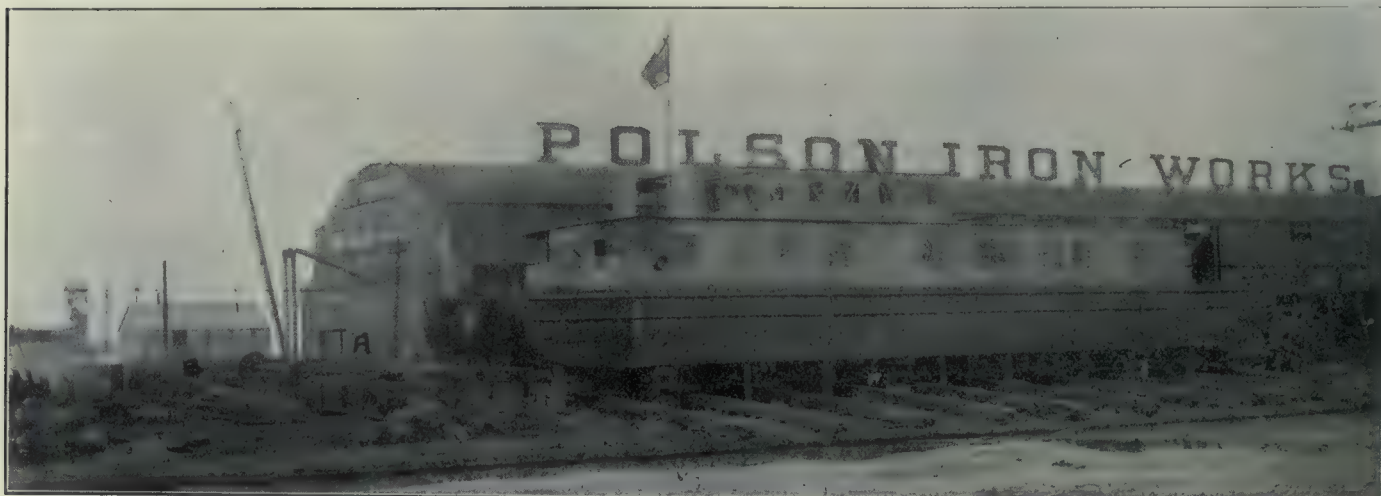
The Dredge Shuniah Before Launching, Polson Iron Works, Toronto.
